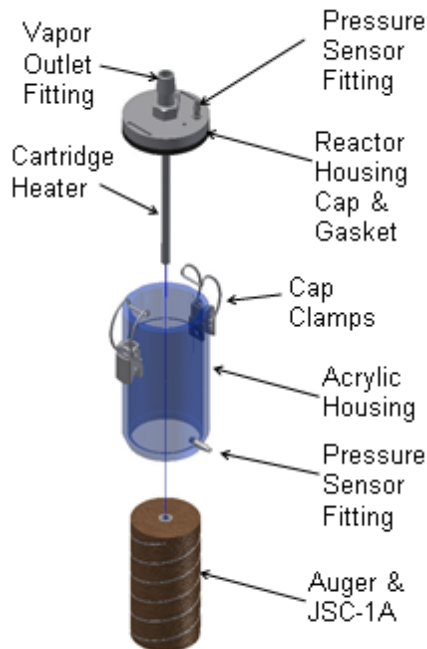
Exploded view of reactor assembly showing JSC-1A packed onto auger.
